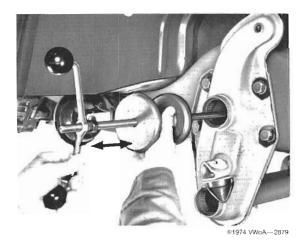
Needle bearing being pulled out of axle tube with slide hammer and toggle washer.
